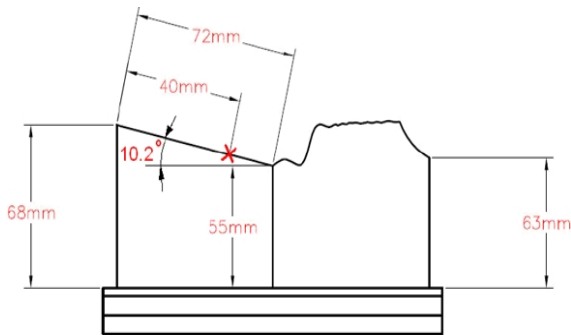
Schematic of front view of the fractured blade with some dimensions and main pit position
